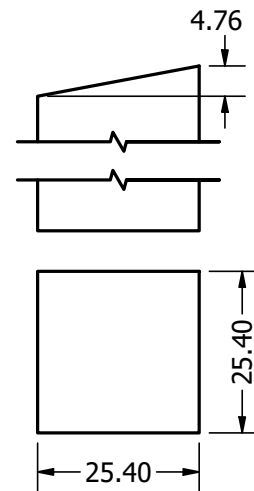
SCHEMATIC OF WORKPIECE WITH ANGLED SURFACE; DIMENSIONS IN MM
